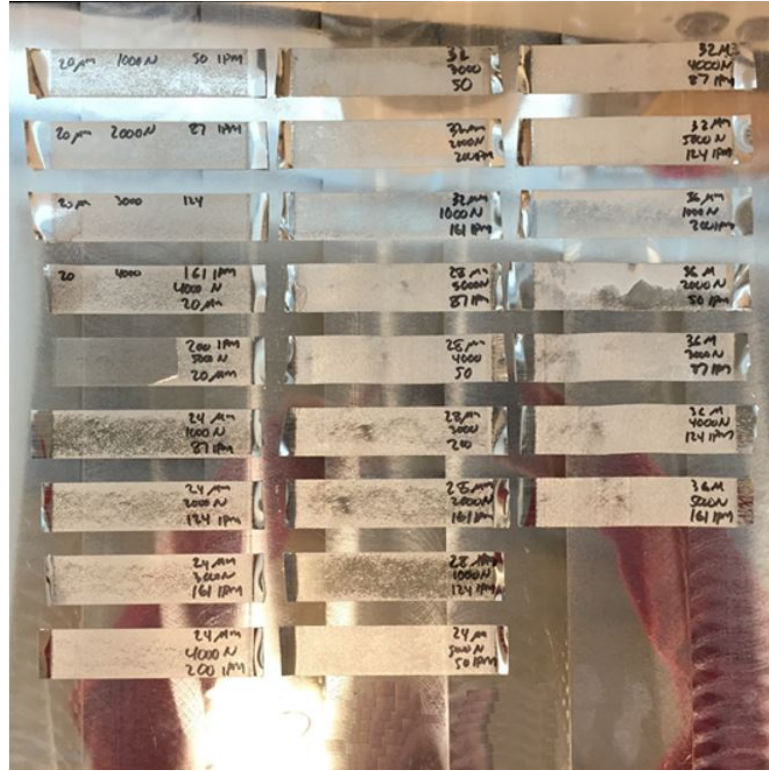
Pilot welds using weld parameter sets from Table 3.3.
